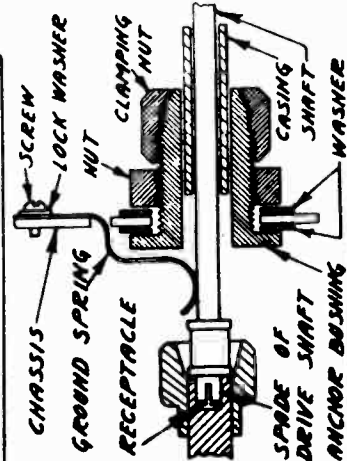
Details of Flexible Shaft Connection at the Chassis
